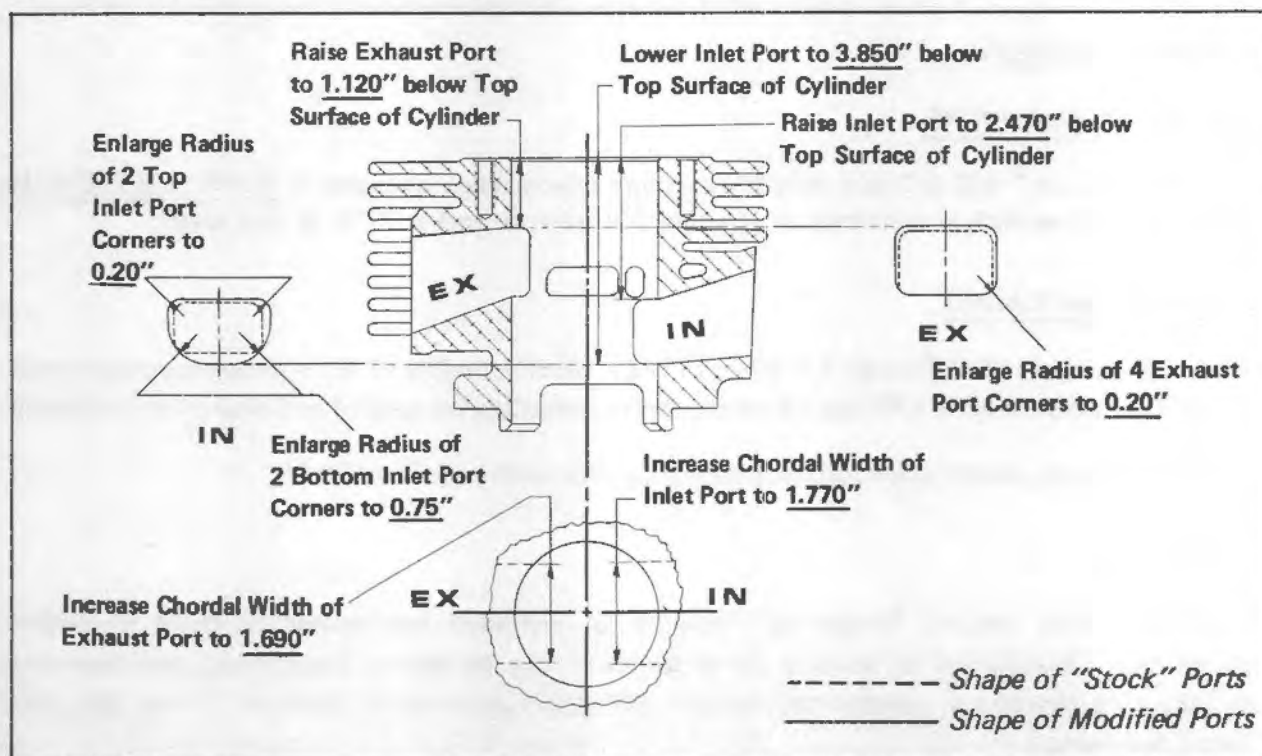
440 S/T "Modified-Stock" and "Super-Modified" Cylinder Dimensions
